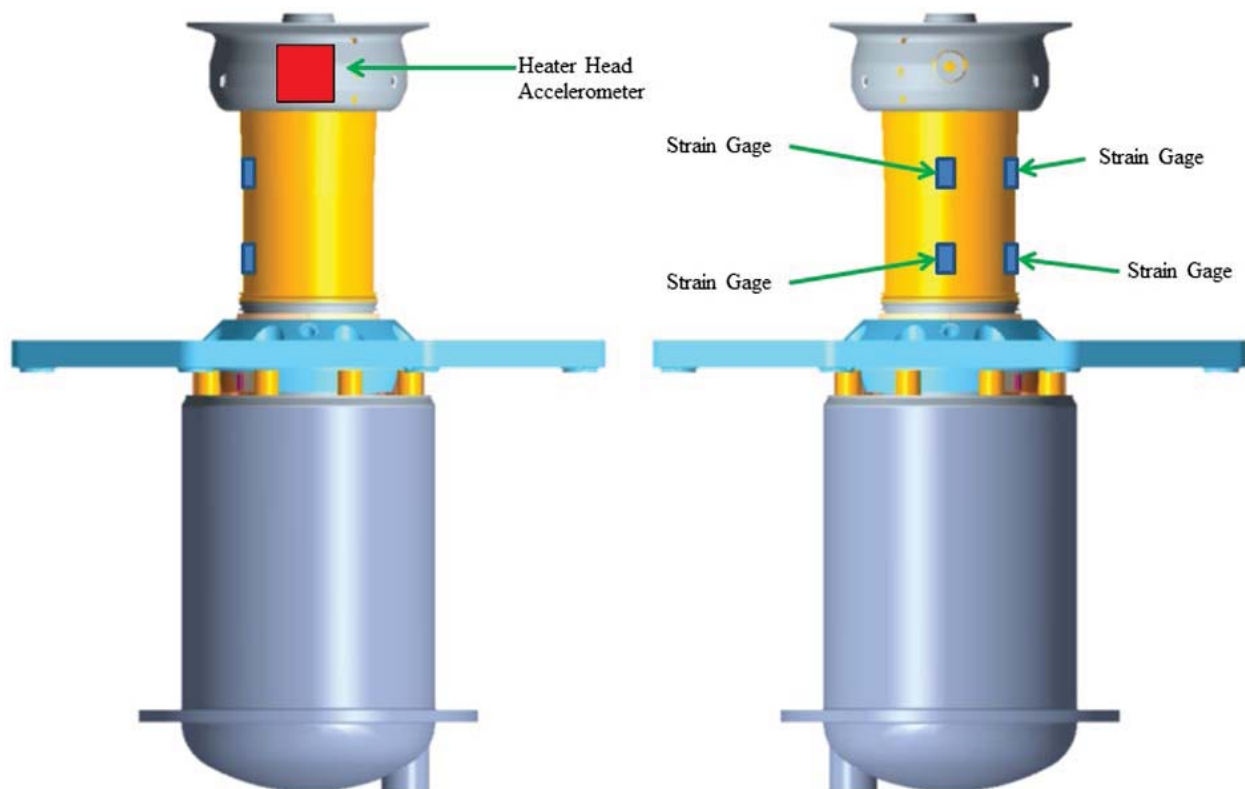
Location of heater head accelerometer and strain gages. Heater head portion is circled.
